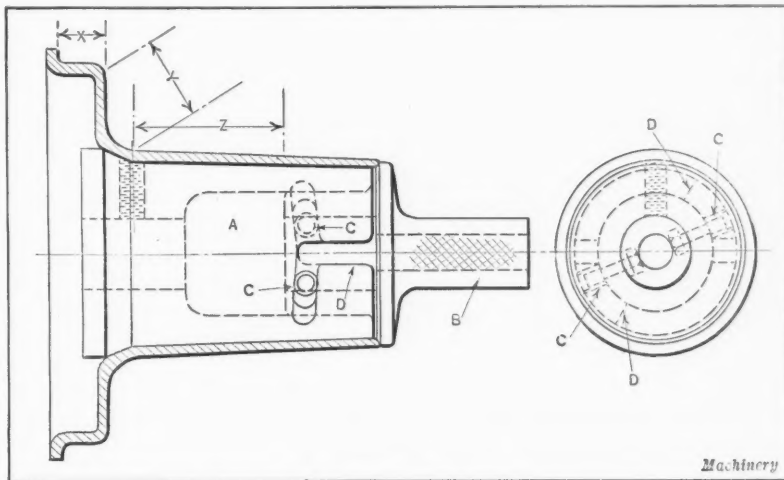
Design of Chuck employed in buffing an Automobile Wheel Hub
